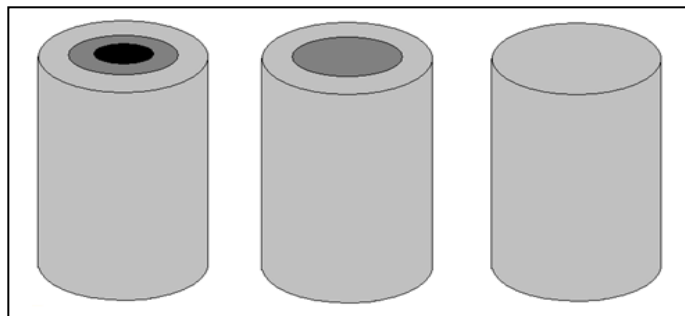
One-layer, two-layer and three-layer cylindrical moldings
